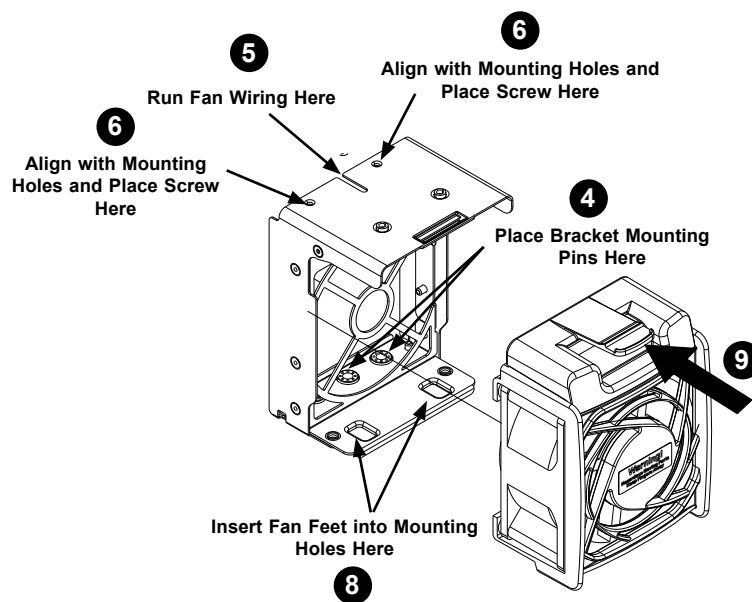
External Rear Fan Bracket Mounting Pin Placement
